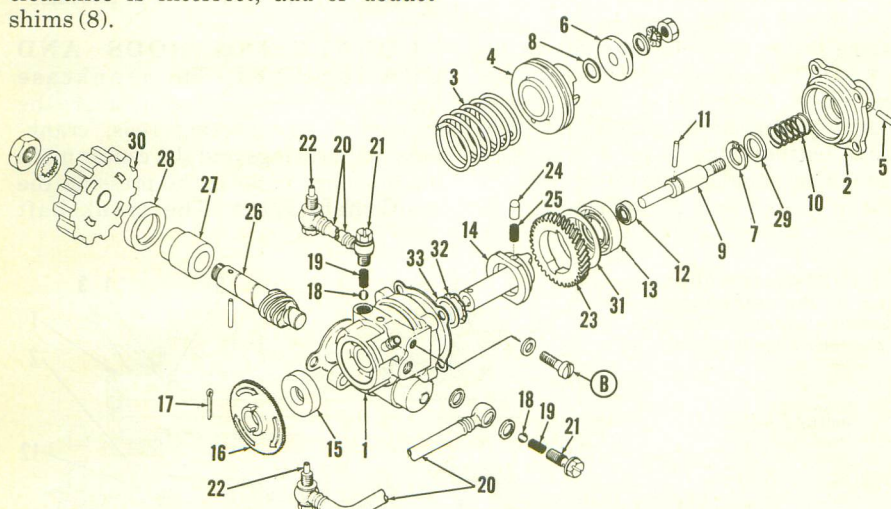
Exploded view of the oil injection pump unit. Bleeder screw is shown at (B).
